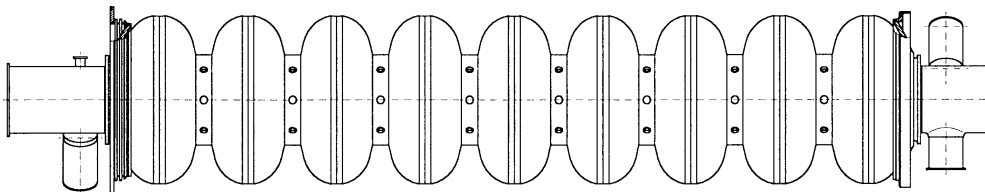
TESLA cavity. 1,2 - welded HOM couplers. 3 - port of the pick up antenna. 4 - port of the input coupler. 5 - bellows.
